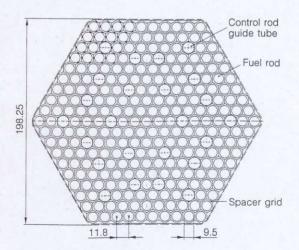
Cross section of a typical APWR fuel assembly, from [25]. Dimensions in mm
